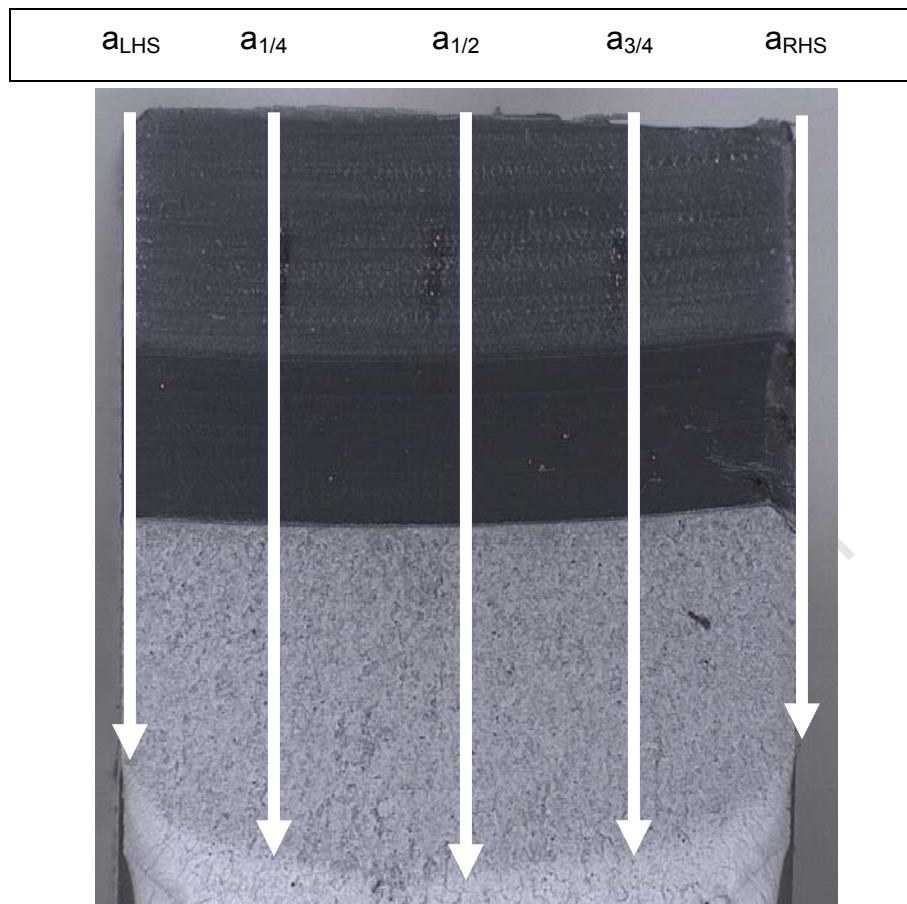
Fracture surface and crack measurements for SENB specimens
